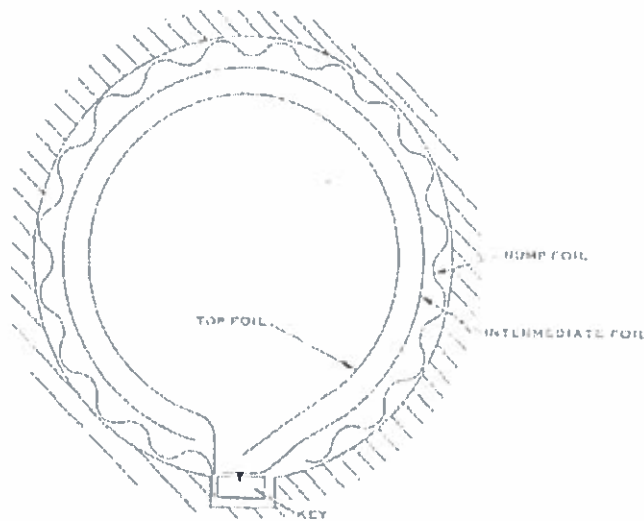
Reversed Multilayer Foil Journal Bearing Schematic
